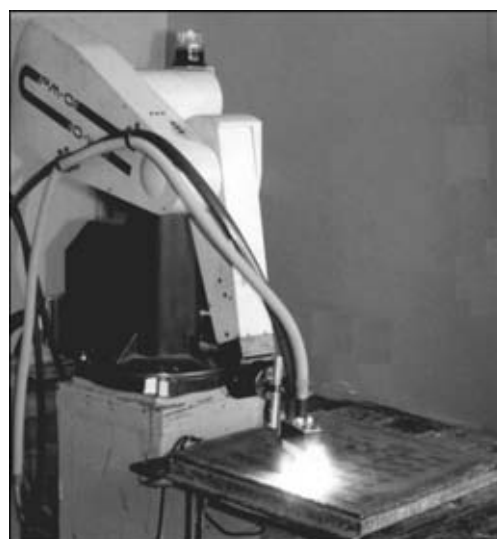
Automated complex for thermal straightening of thin-sheet welded structures
